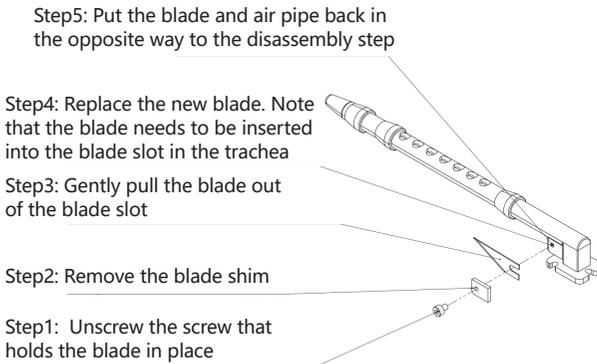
(Diagram of Air Tube and Blade Disassembly and Installation)
